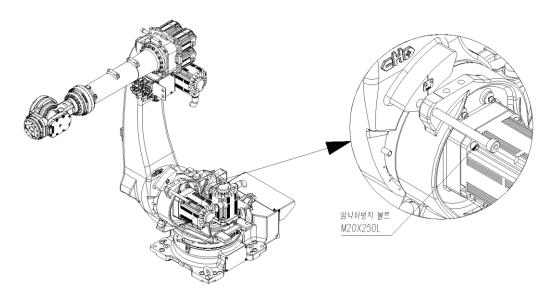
Insertion position of Arm 1 (H axis) fixing bolt
